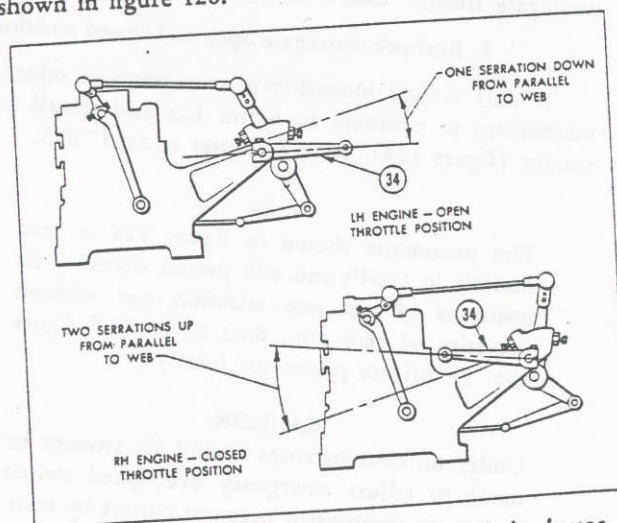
Angular Setting of Main Lever Arm, Manifold Pressure Regulator
